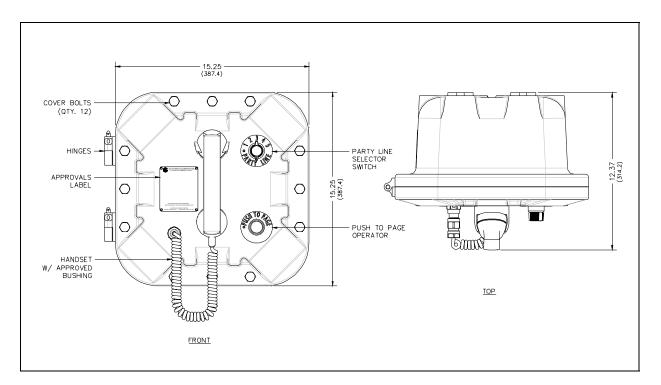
Model 7085-005-EX-F07050 Outline Drawing
